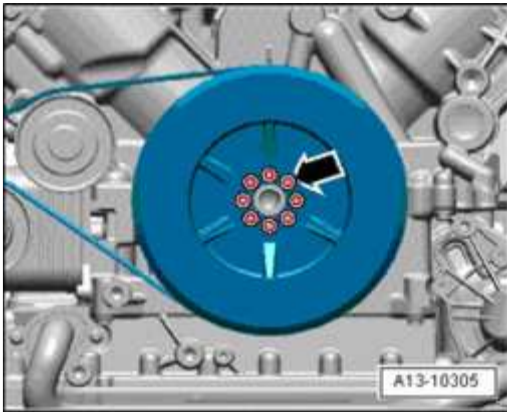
Loosening Mounting Bolts On Vibration Damper
